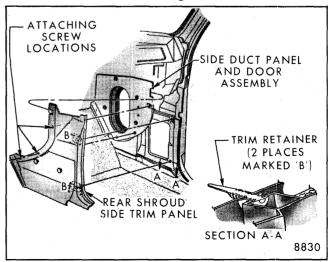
Rear Shroud Side Trim Panel - Right Side
